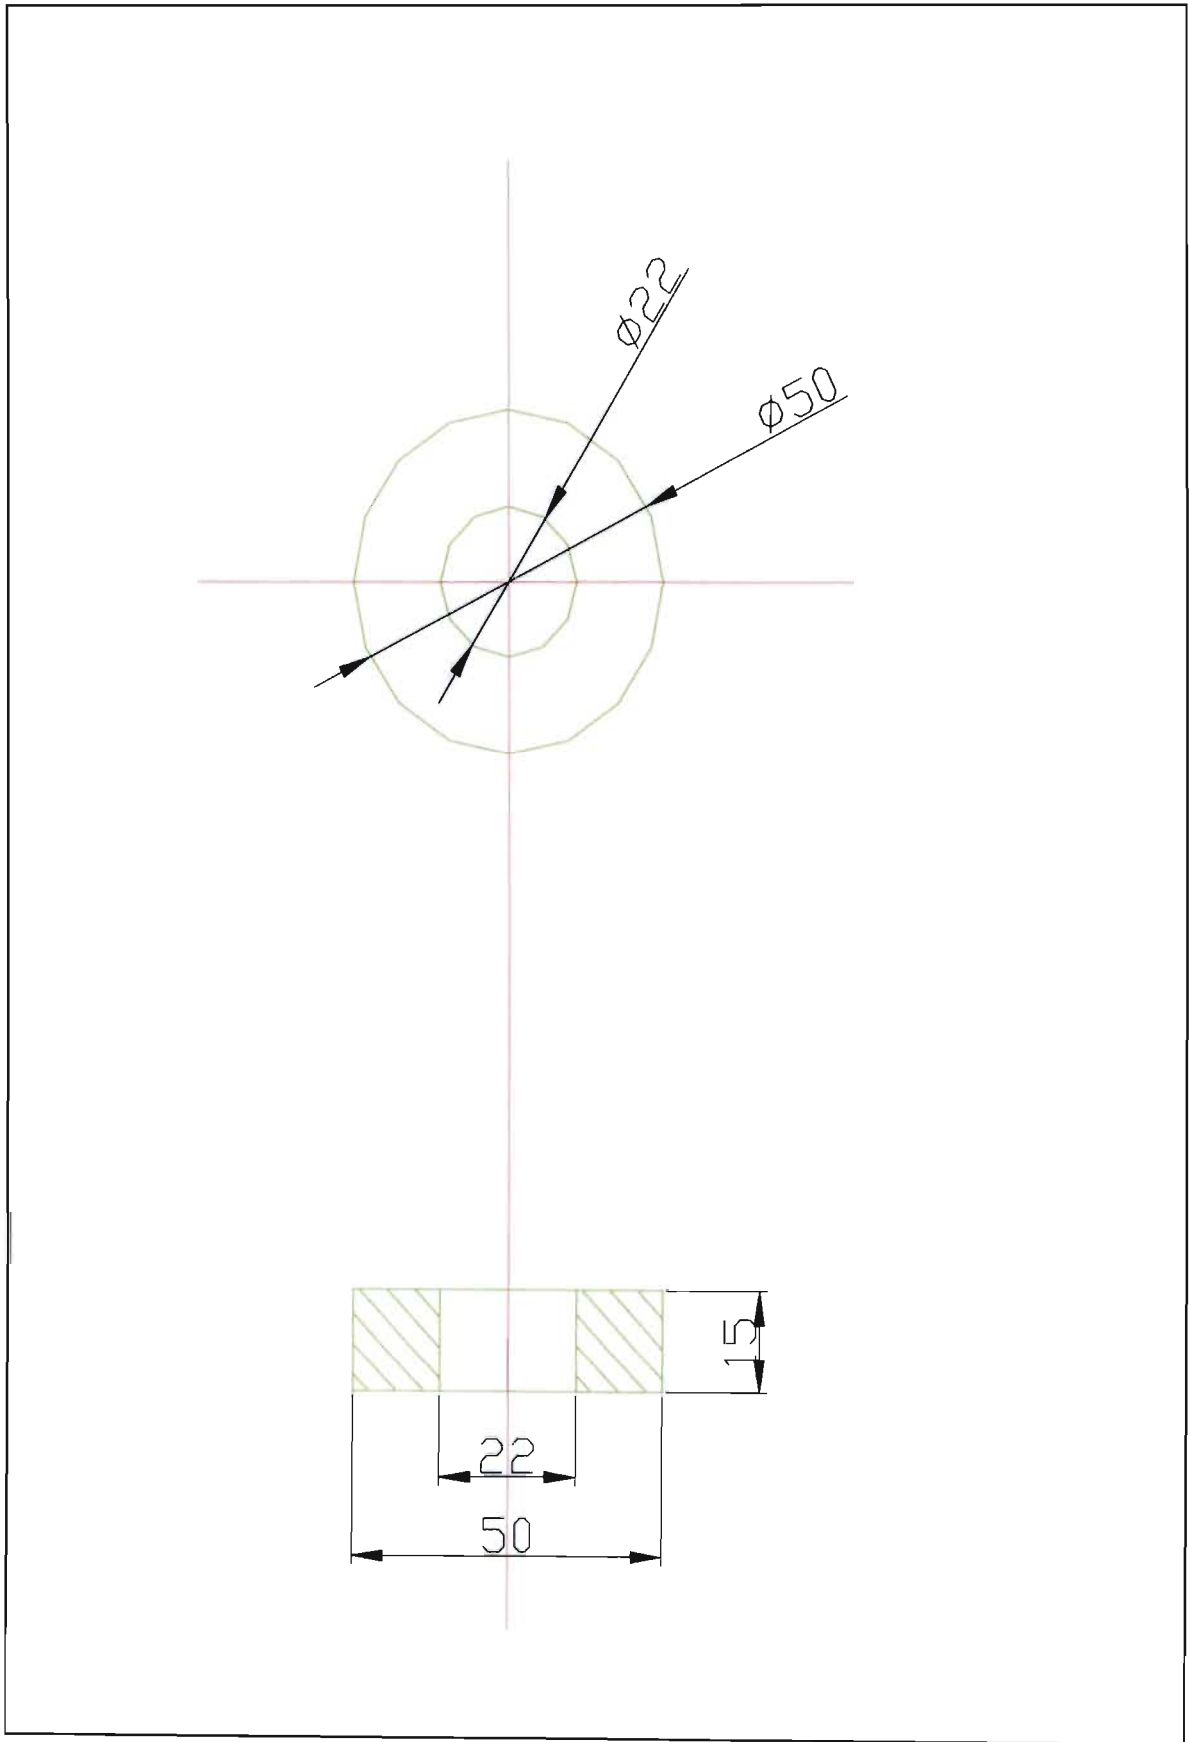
Drawing Design of the Small Flanges of Convoluted Heat Transfer Pips
